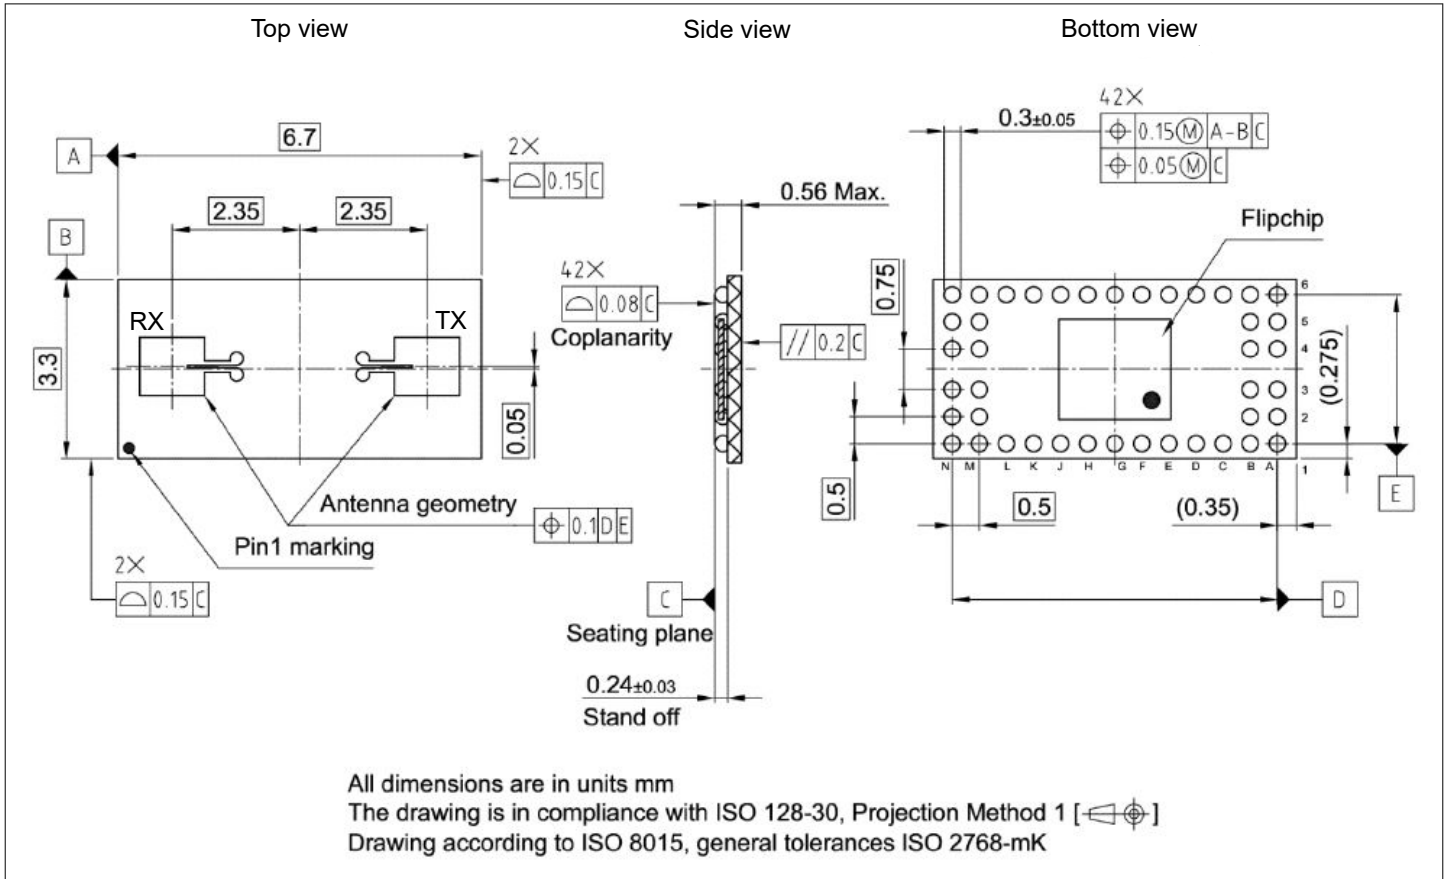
Package outline. Top, side and bottom view of PG-UF2BGA-42-1
